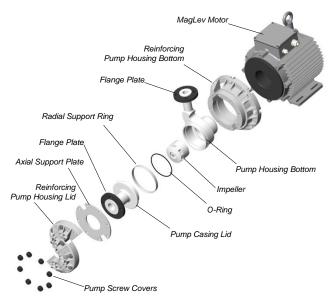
Disassembled pump head LPP-4000.4/5 (LPP-4000.2 does not have radial and axial support ring and plate)
